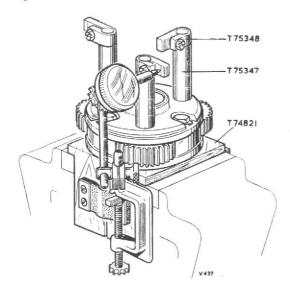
Planet gear carrier secured in wooden vice block T74821 with dummy spindles fitted for backlash checks
